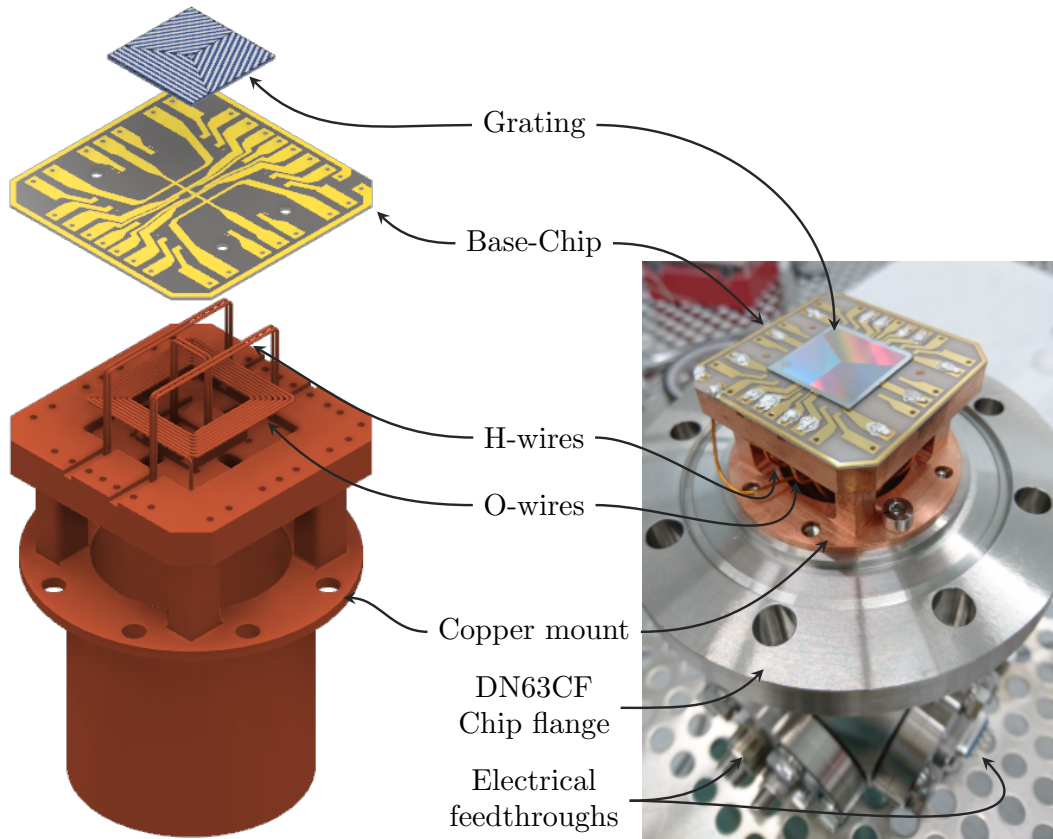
Grating atom chip in a CAD explosion view (left) and final assembly (right). Mesoscopic “H” and “O”-copper wires are placed into a copper mount which is topped with the Base-Chip. The chip is connected to vacuum feedthroughs via wires that are glued on the surface with an electrically conducting adhesive. The grating is glued on top as the final chip layer. A DN63CF chip flange accommodates the copper holder and attaches it to the vacuum chamber.
